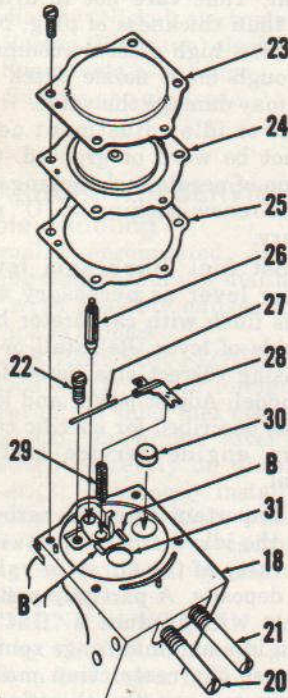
Bottom view of carburetor showing exploded view of metering diaphragm, lever and inlet valve assembly. Refer to Fig. S14 for exploded view of other carburetor parts.
